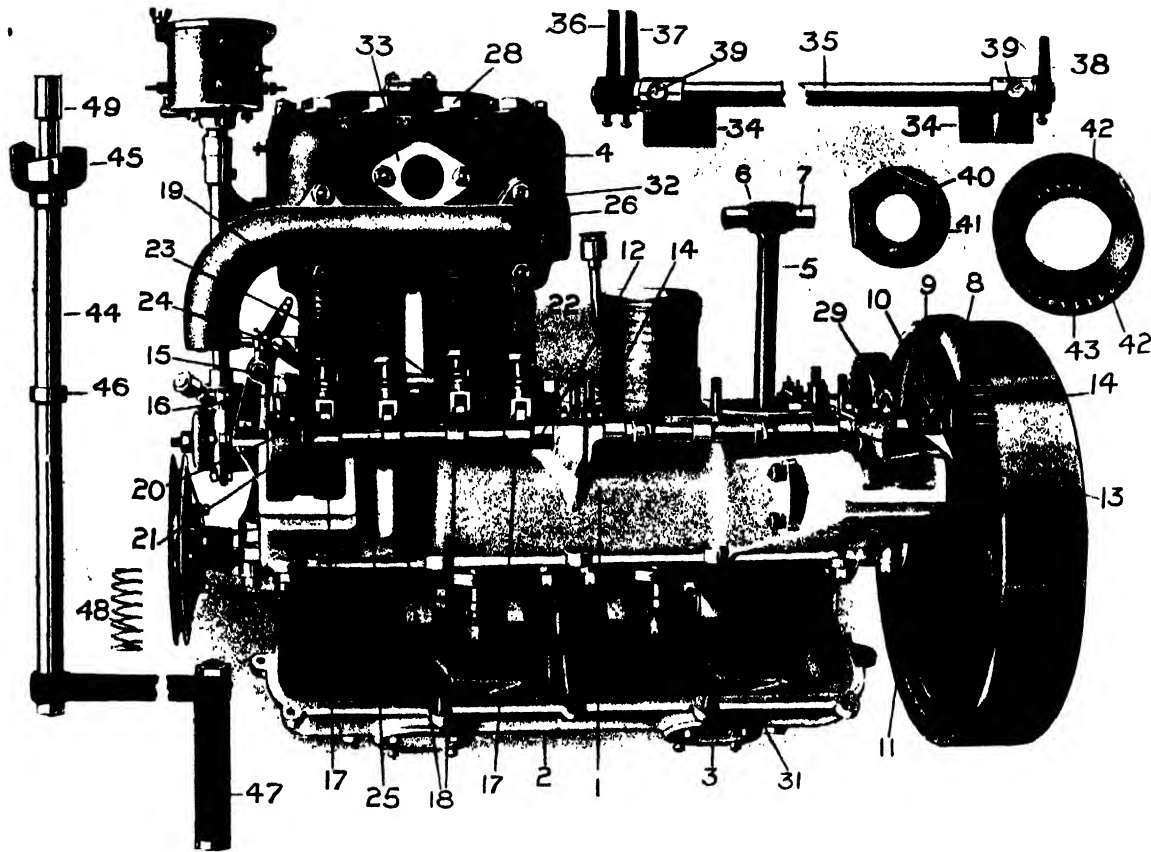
Daimler Four-cylinder Engine, Valve Side
